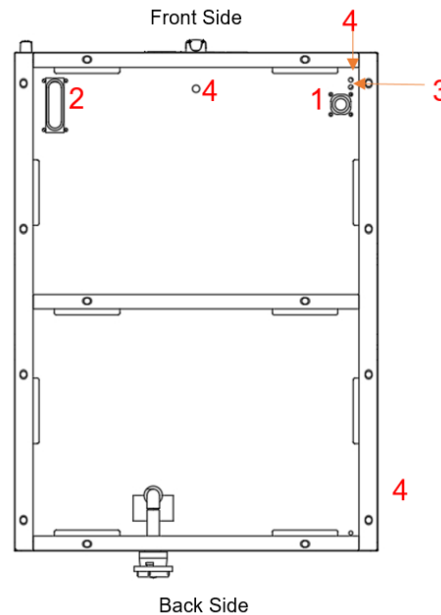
Bottom Incoming and Outgoing Line Holes
